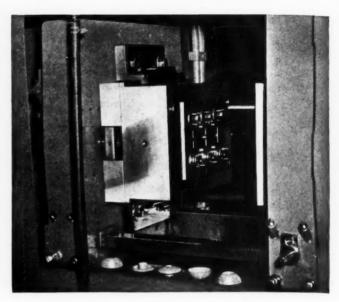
One Half of the Mold in an Injection Type Molding Machine which Produces Both Halves of Gear-shift Lever Knobs
